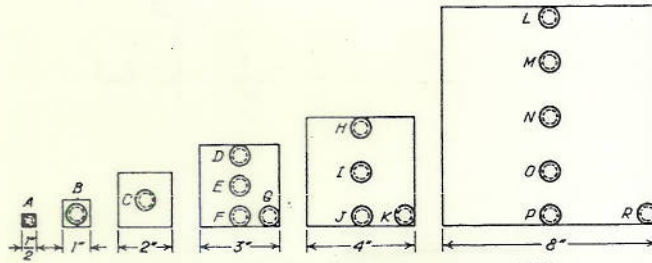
Location of Test Bars in the Carbon Cast Steel Blocks.
